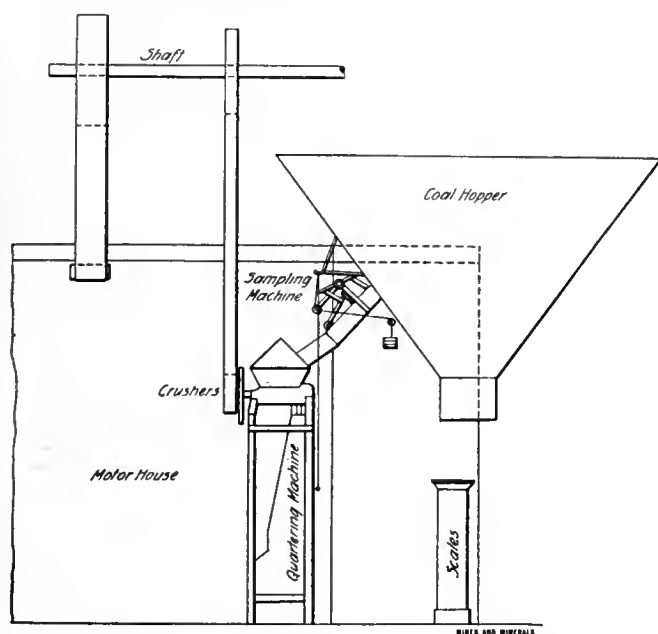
ELEVATION OF MECHANICAL COAL SAMPLER
